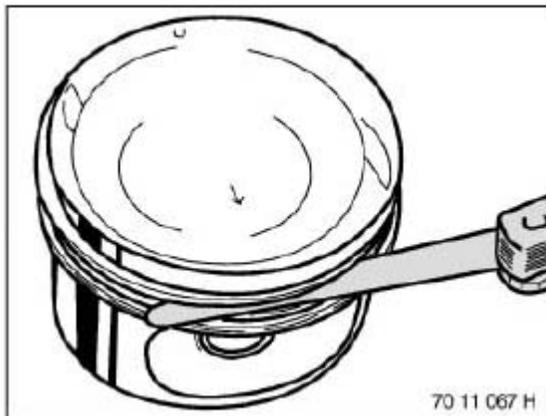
Measuring Axial Clearance Of Piston Rings In Piston Ring Groove
